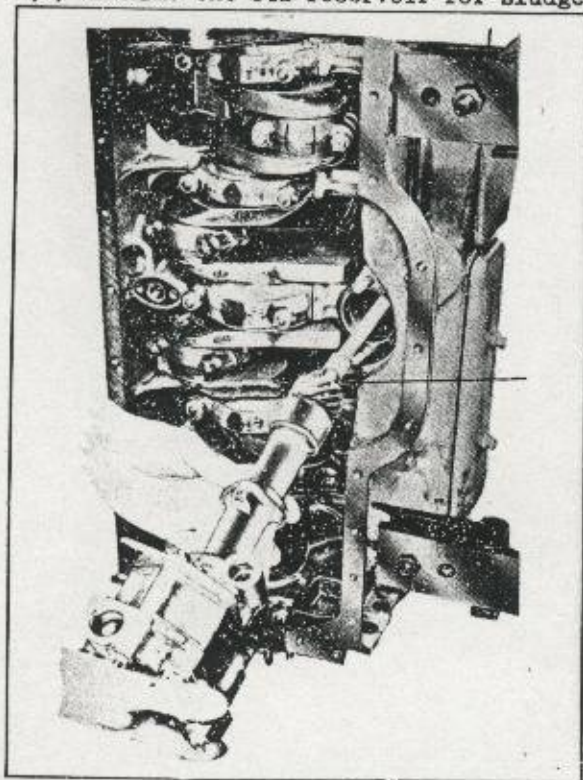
OIL PUMP REPLACEMENT - PUMP DRIVE ADVANCED 45° AND DISTRIBUTOR DRIVE SHAFT IN POSITION
